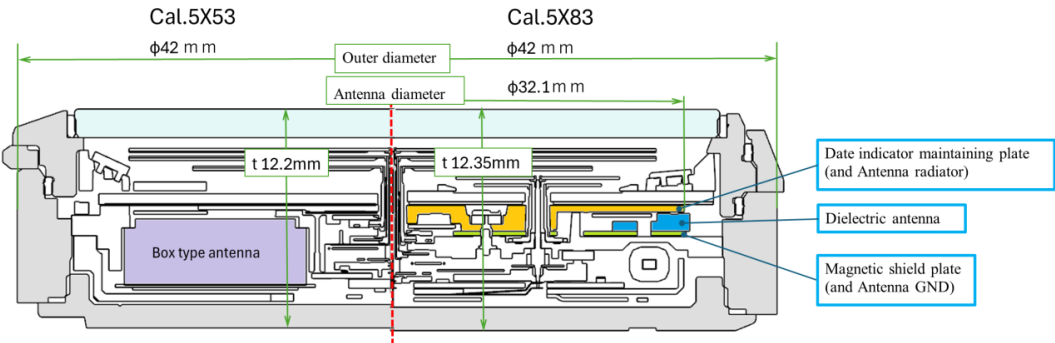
A cross-sectional view of Cal.5X53 and Cal.5X83.
